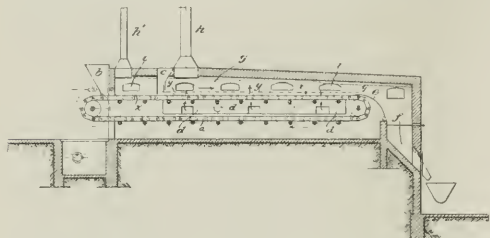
LONGITUDINAL SECTION OF SINTERING MACHINE
